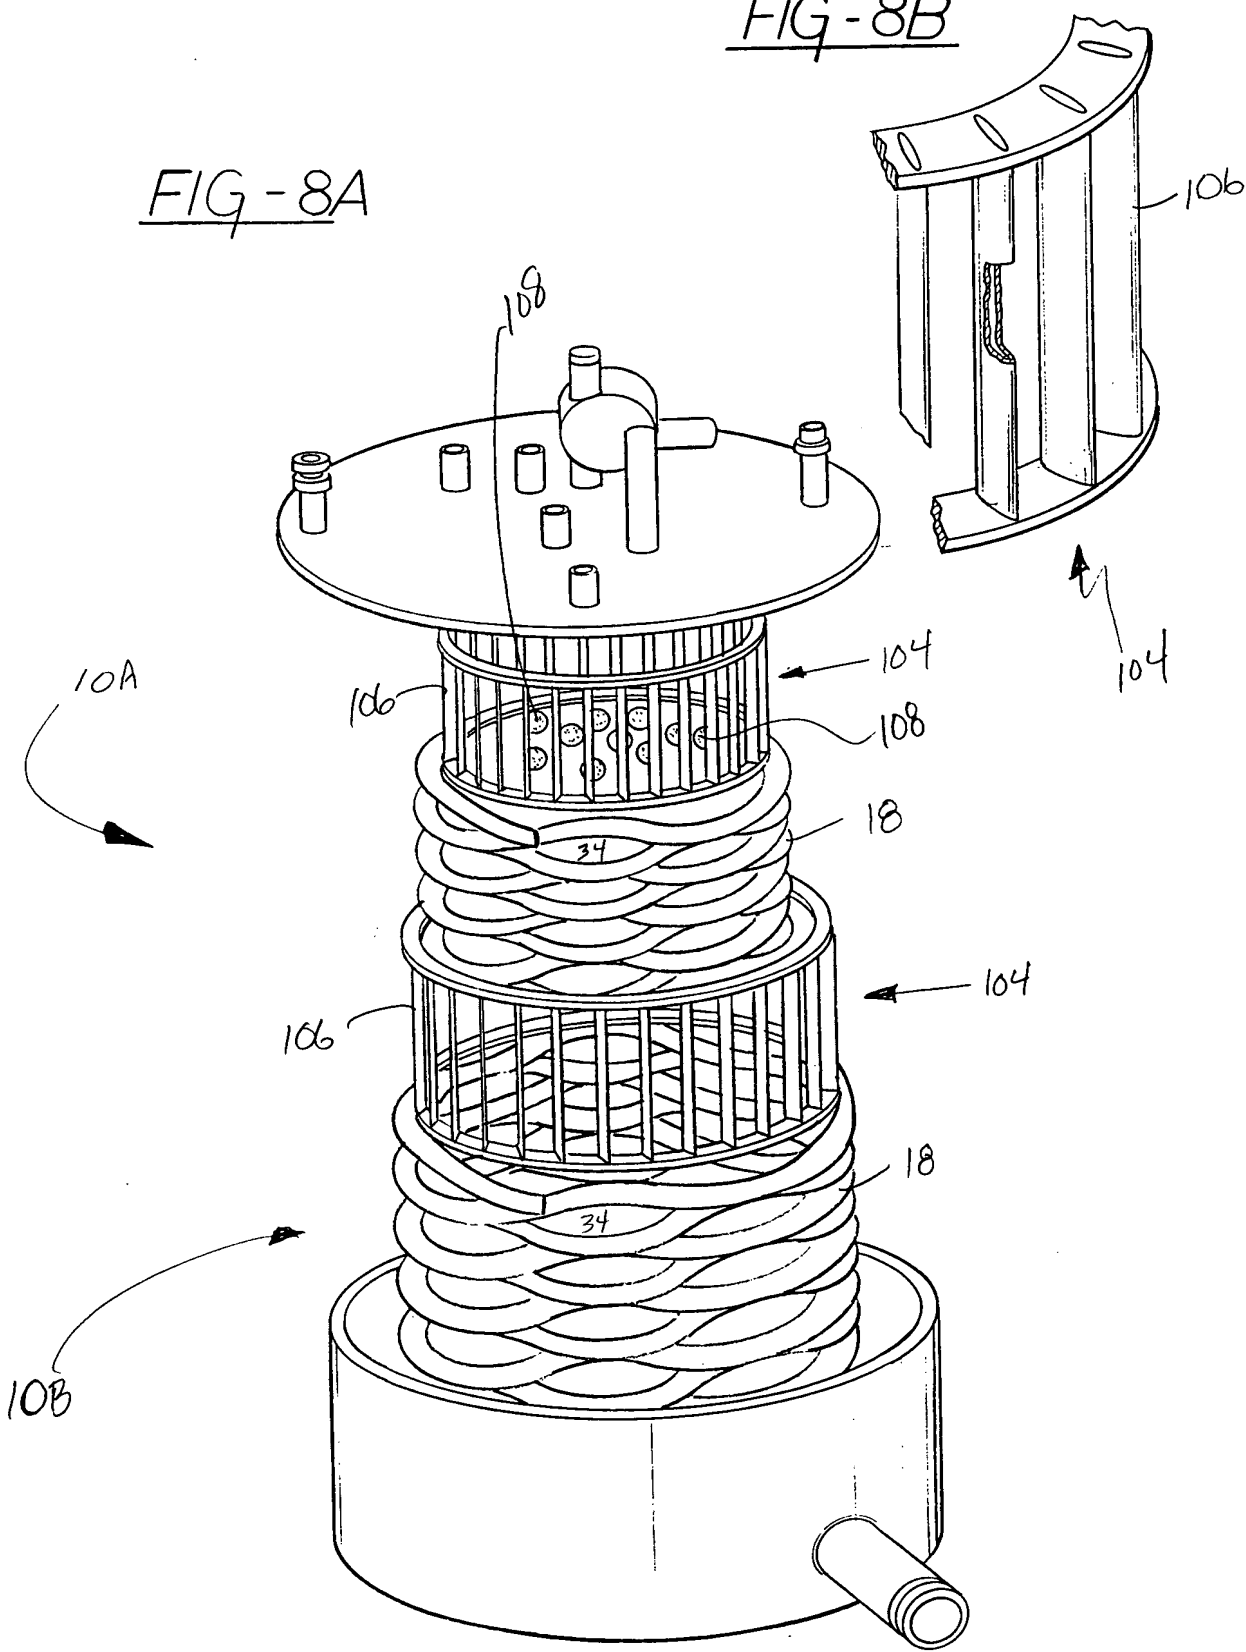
A is a perspective view of a mechanical assembly. FIG. 8B is a cross-sectional view of a component of the assembly.
